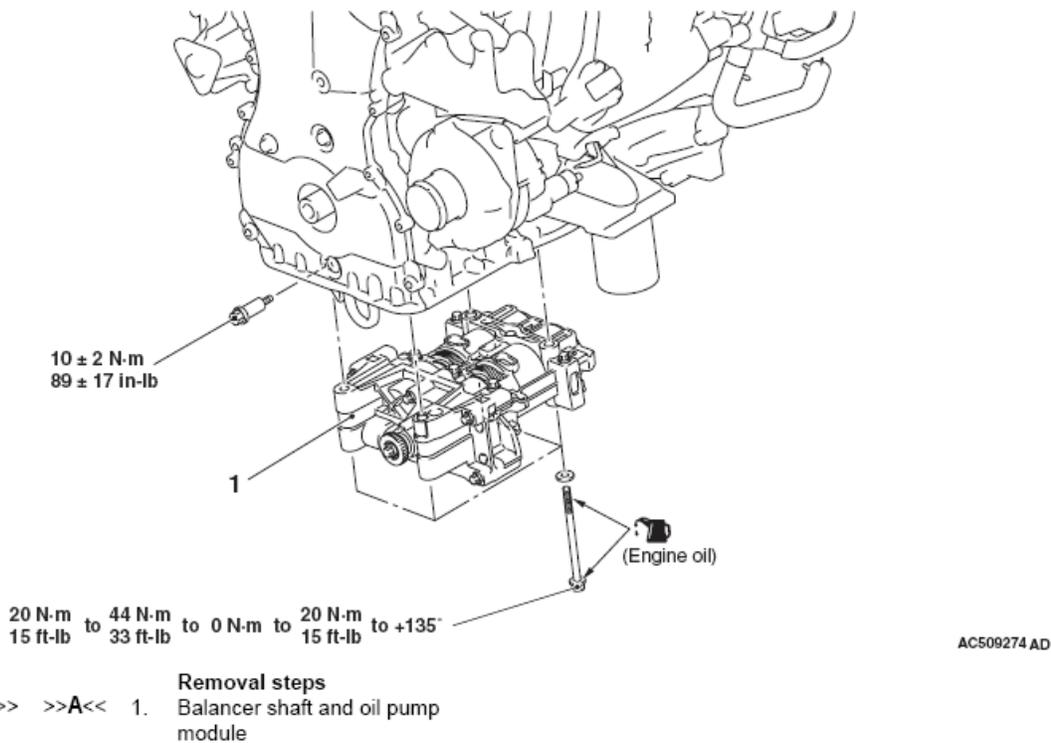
Identifying Balancer Shaft And Oil Pump Module With Torque Specifications
